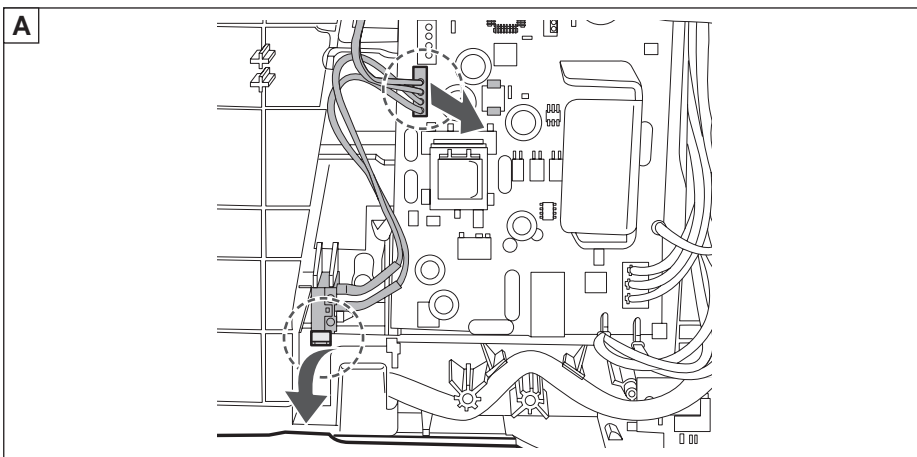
Figure A: disconnect the wiring connection with the CPU BOARD to extract the CAPSULE TRAY PRESENCE microswitch while using the lower tooth shown as a lever.
